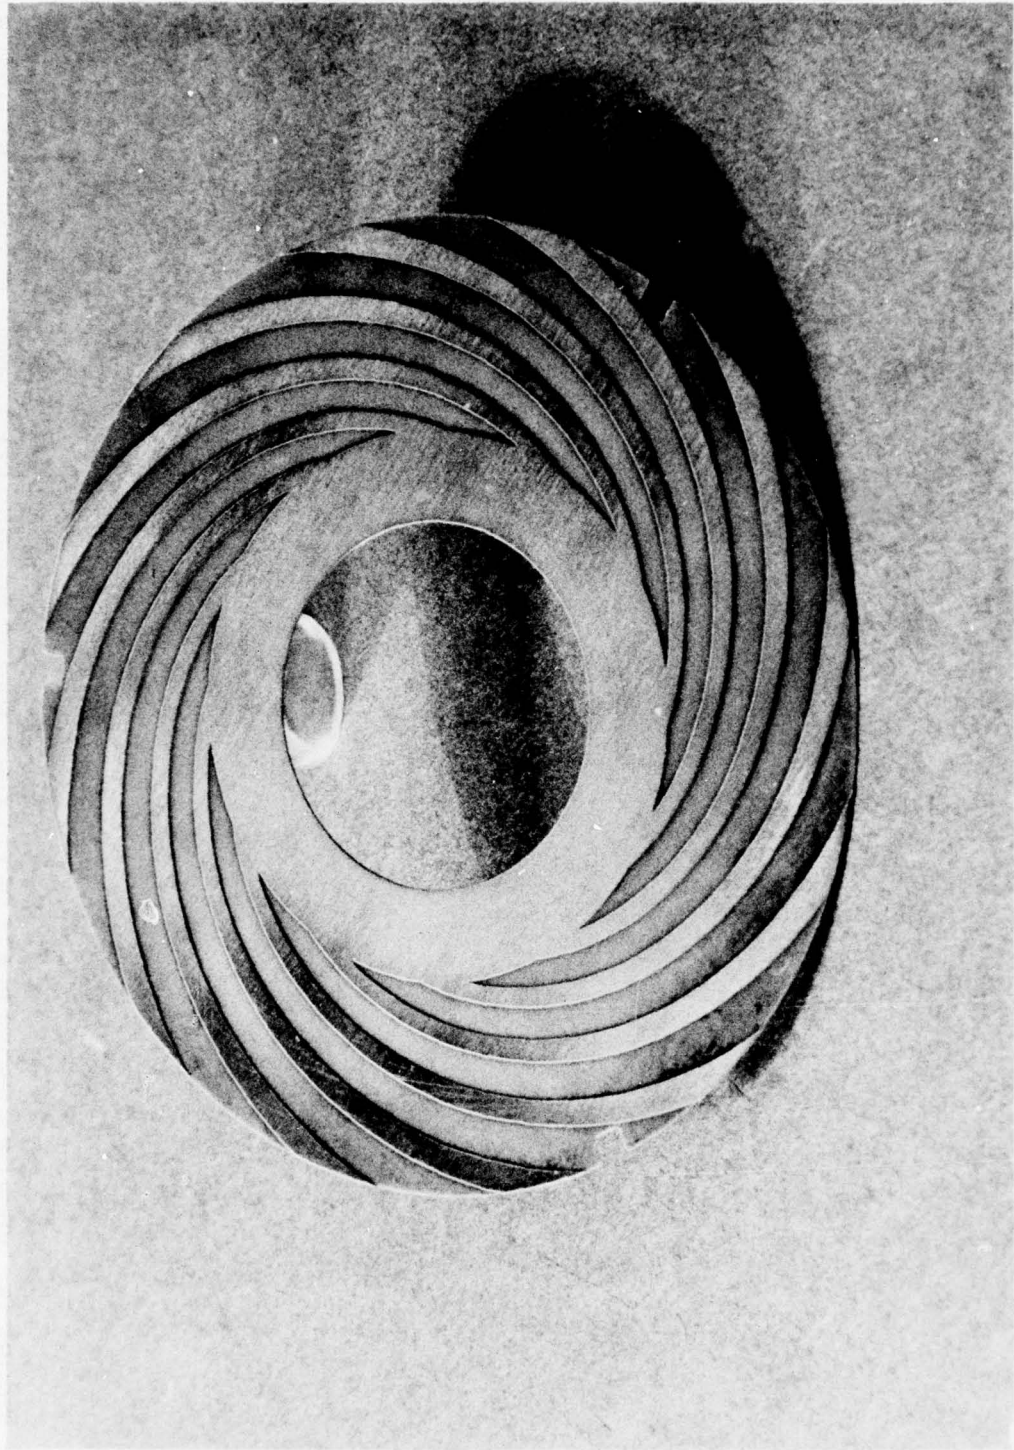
VIEW OF SPIRALLY GROOVED MEMBRANE OF FLEXIBLE THRUST BEARING LLF-1T (AND LLF-2T)
